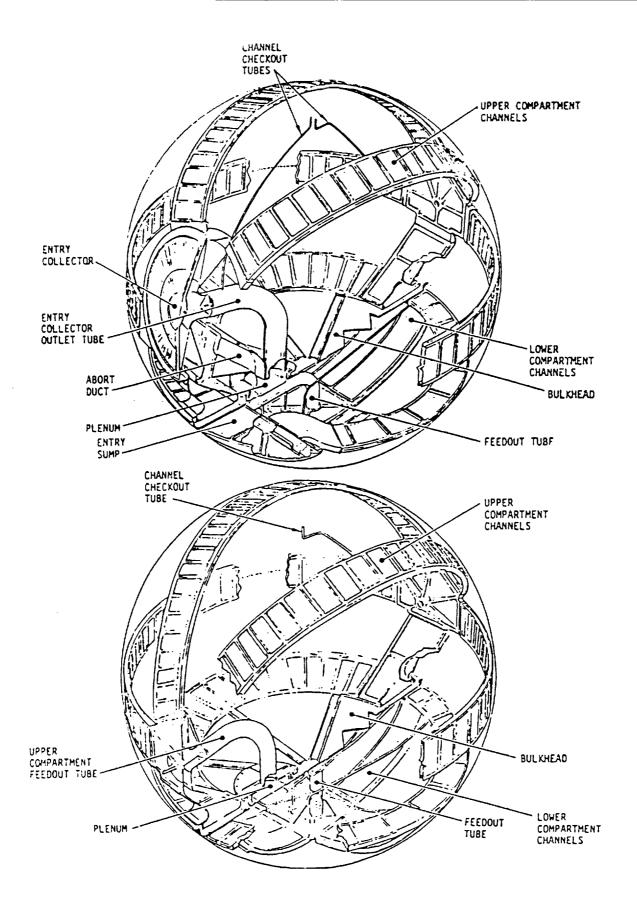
AFT AND FORWARD RCS PROPELLANT TANKS
